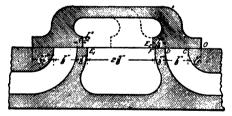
Section of Valve Designed from Diagram Fig. 32
